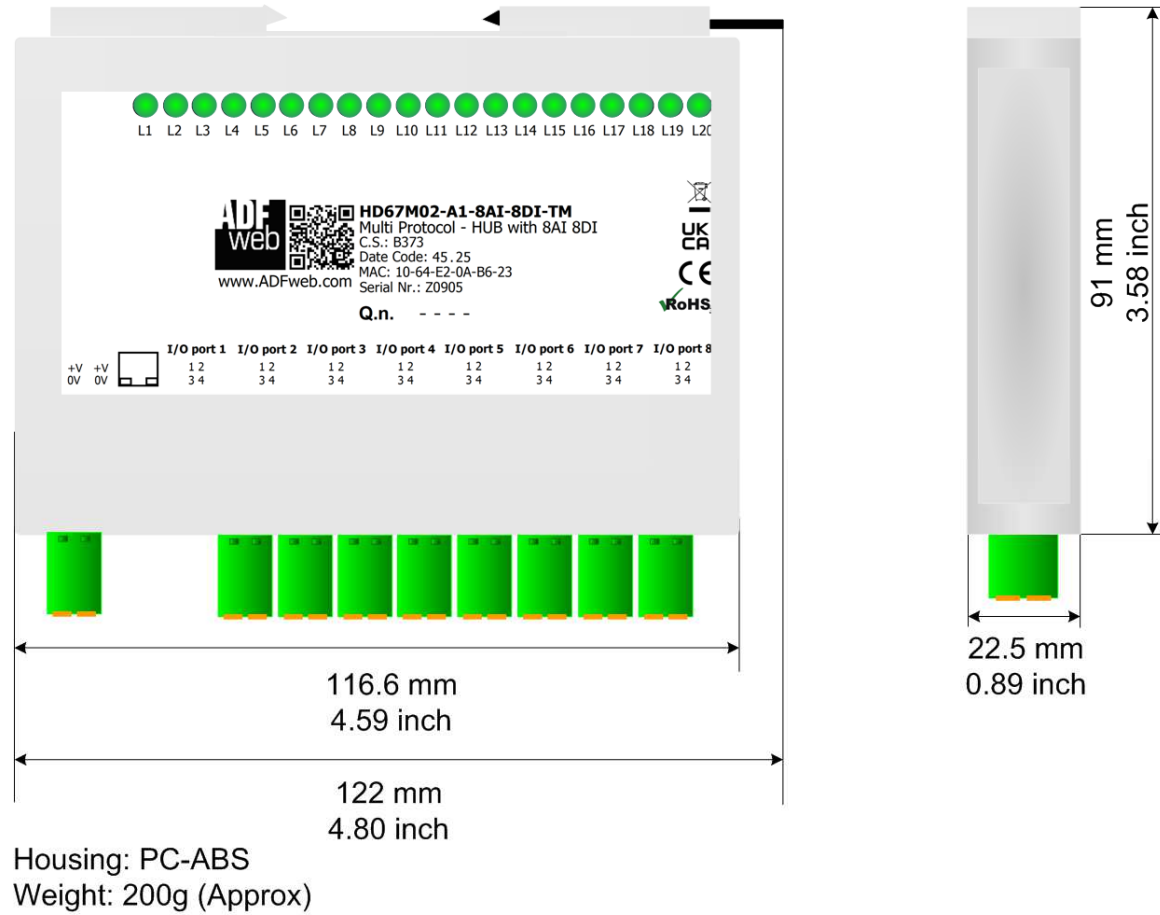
Mechanical dimensions scheme for HD67M02-A1-8AI-8DI-TM
